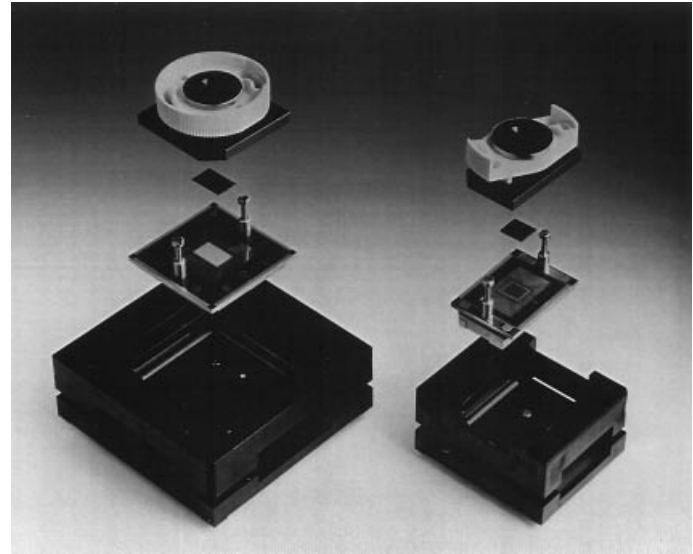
DieMate™ carrier showing assembly open to accept die. Photo courtesy of Texas Instruments.
